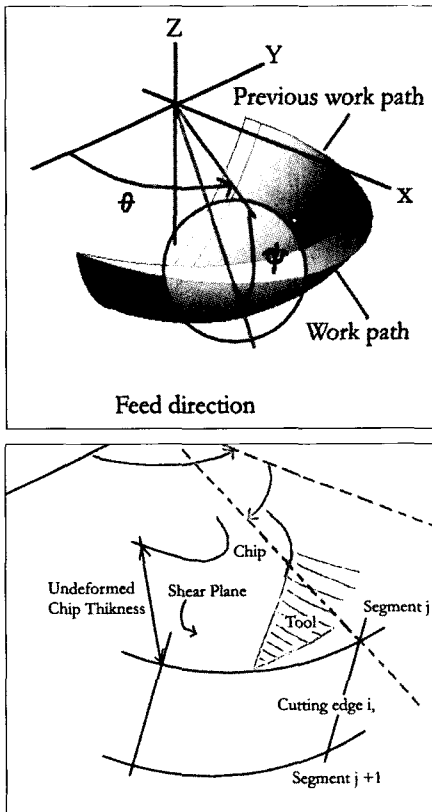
Geometry and cutting force model for Ball end milling cutter
